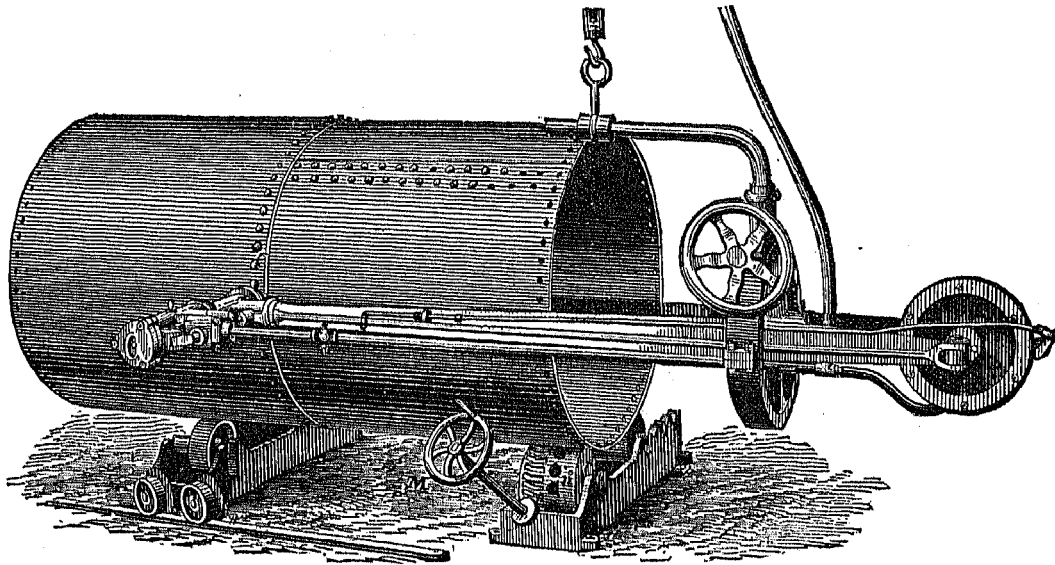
MANNER OF HANDLING BOILERS IN RIVETING.
